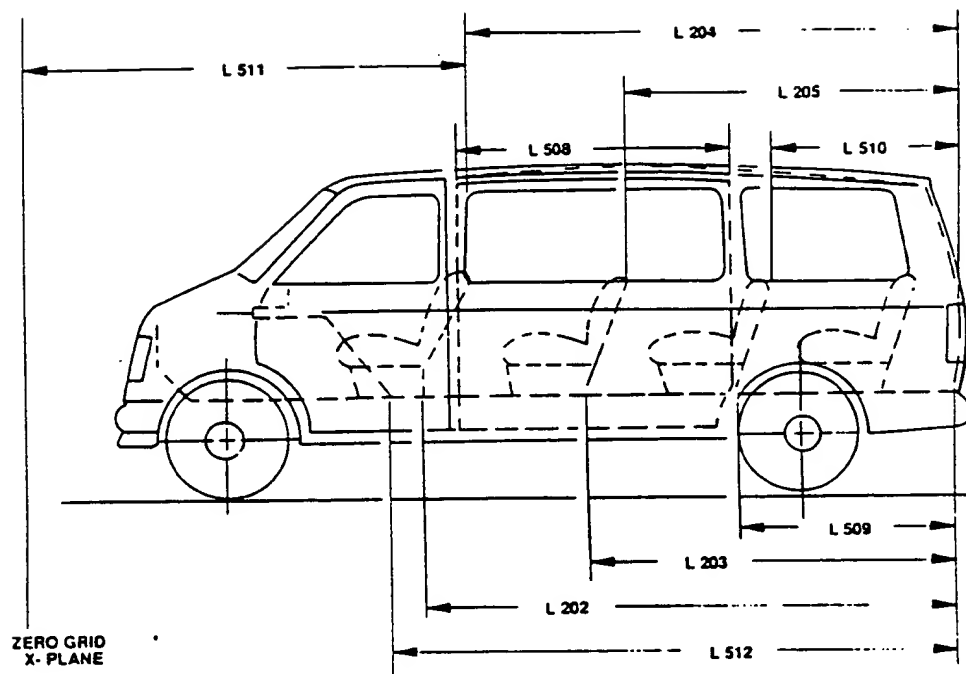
TRUCK CARGO SPACE DIMENSIONS, LENGTH (CONTINUED)
